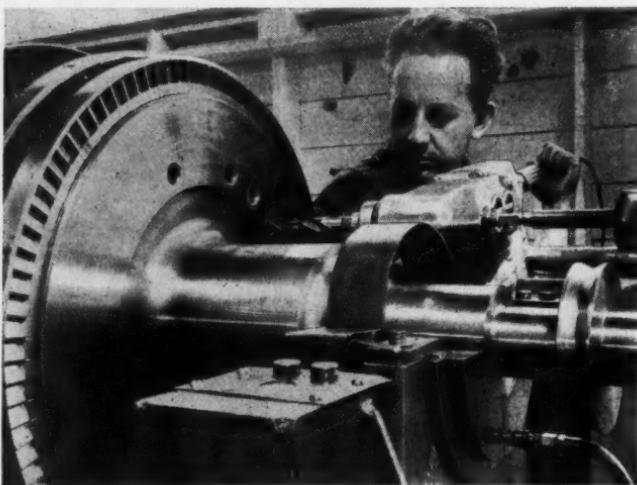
The Exact Amount of Metal that should Be Removed to Balance the Shaft is Removed by Drilling with the Equipment Shown Here
